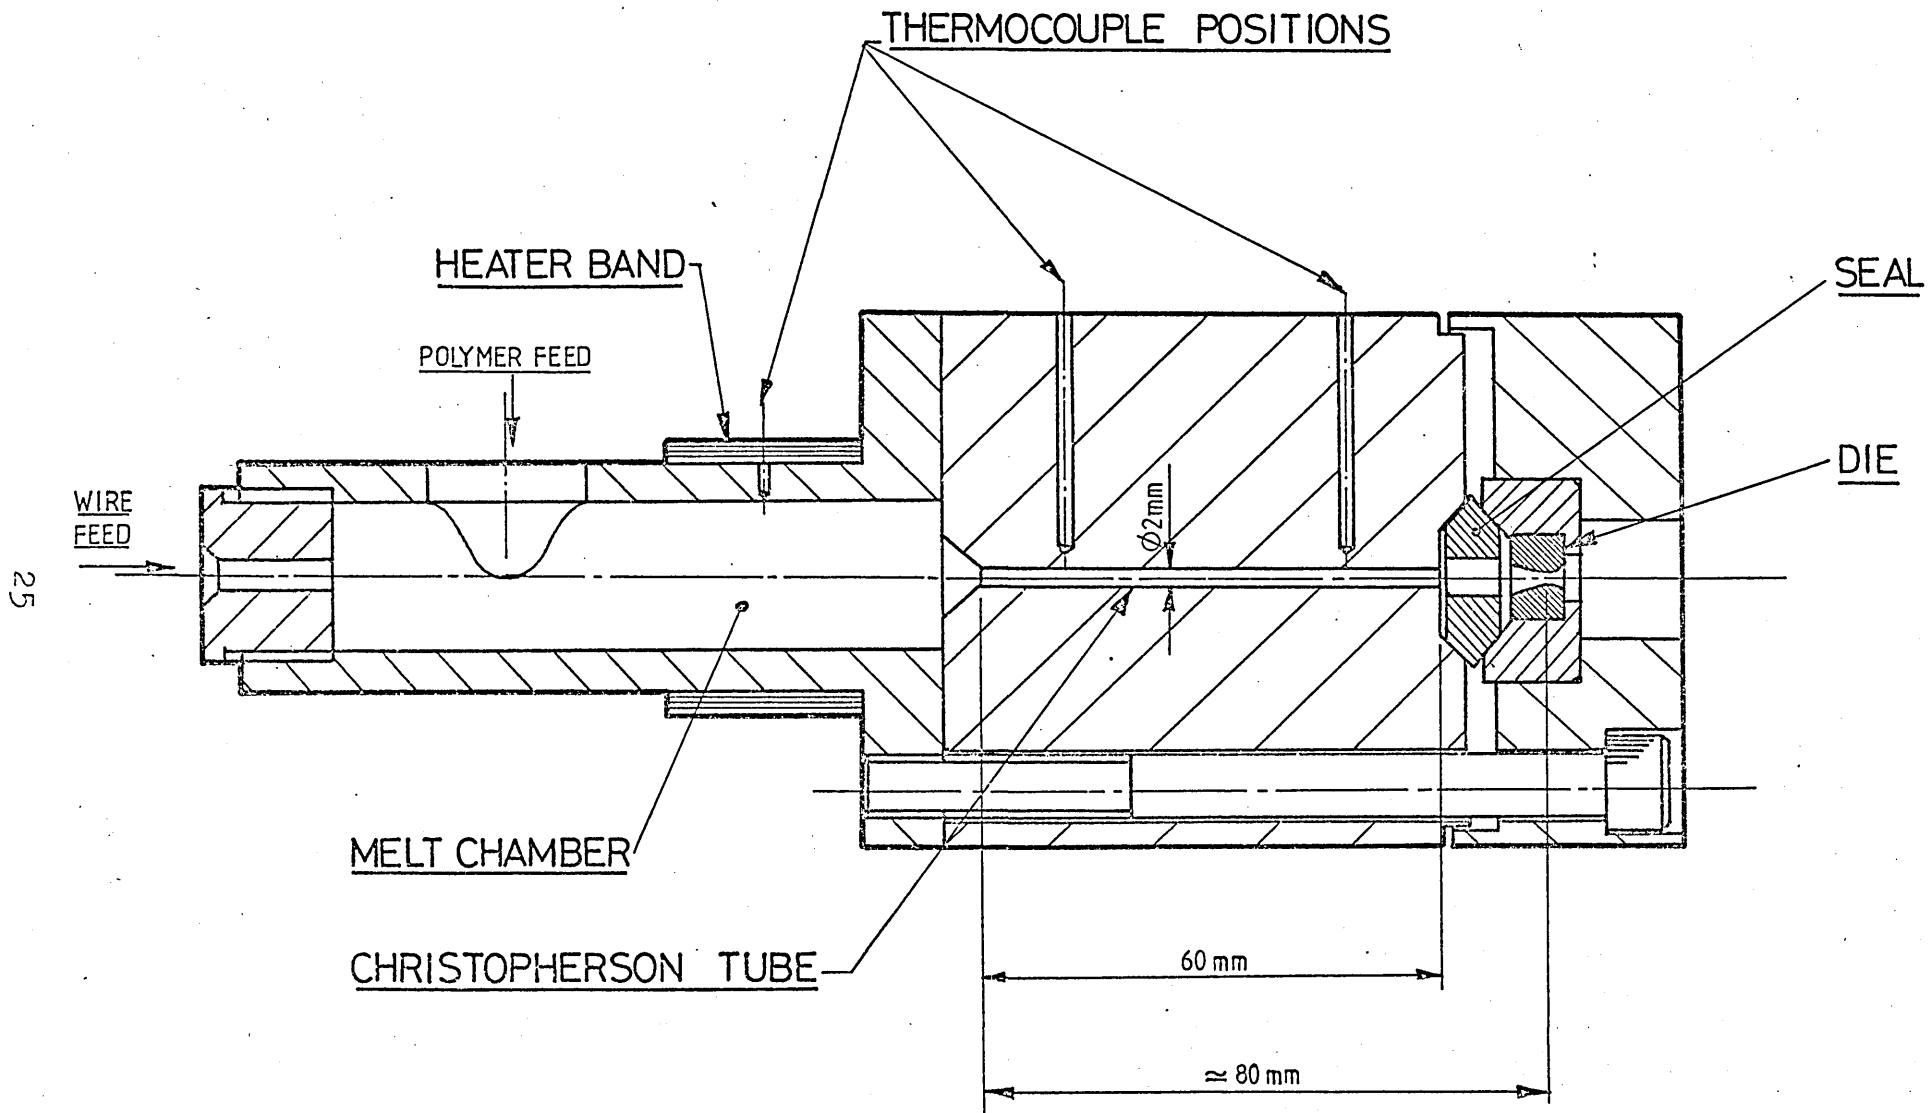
CHRISTOPHERSON TUBE ~ DIE ASSEMBLY
